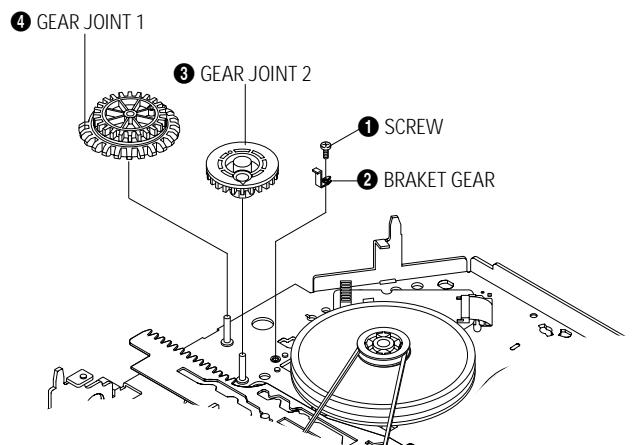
Bracket Gear, Gear Joint 1,2 Removal
